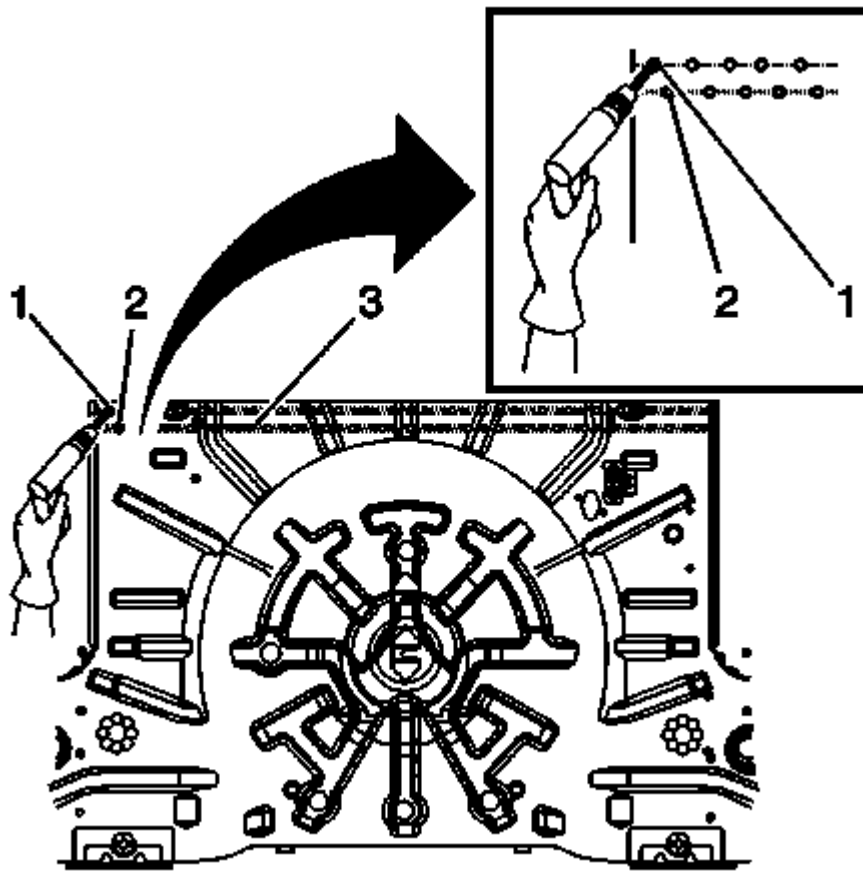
Drilling 8 mm (5/16 in) Plug Weld Holes In Rear Compartment Floor Panel
